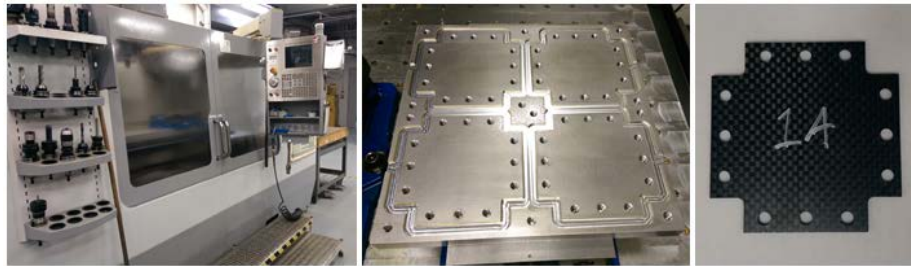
PFS sample plate CNC milling template and finished specimen.
